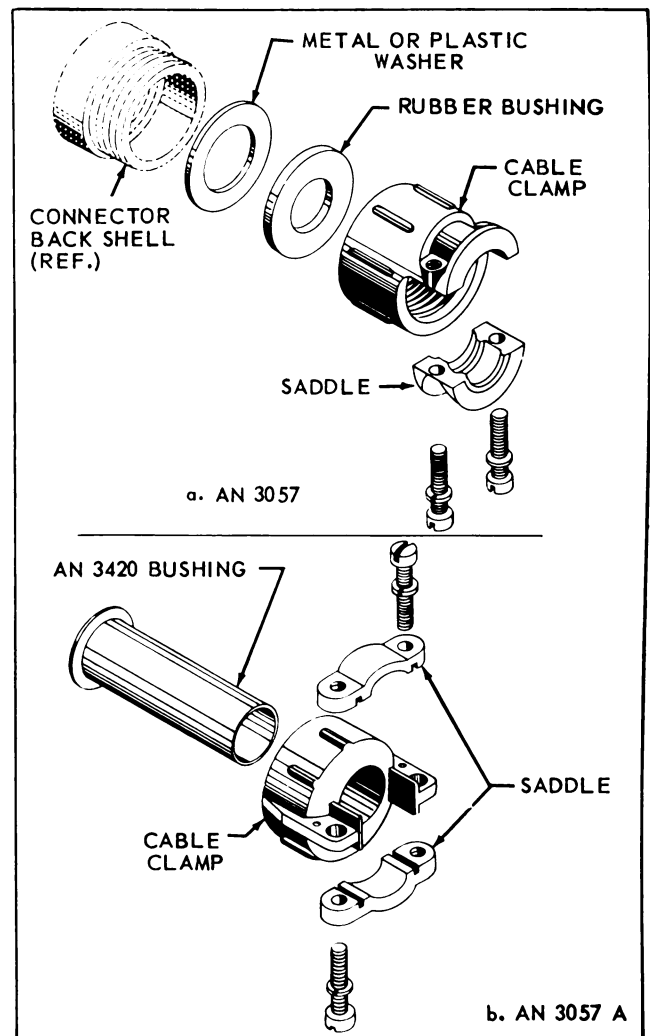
AN 3057 Cable Clamp Types - Exploded View
